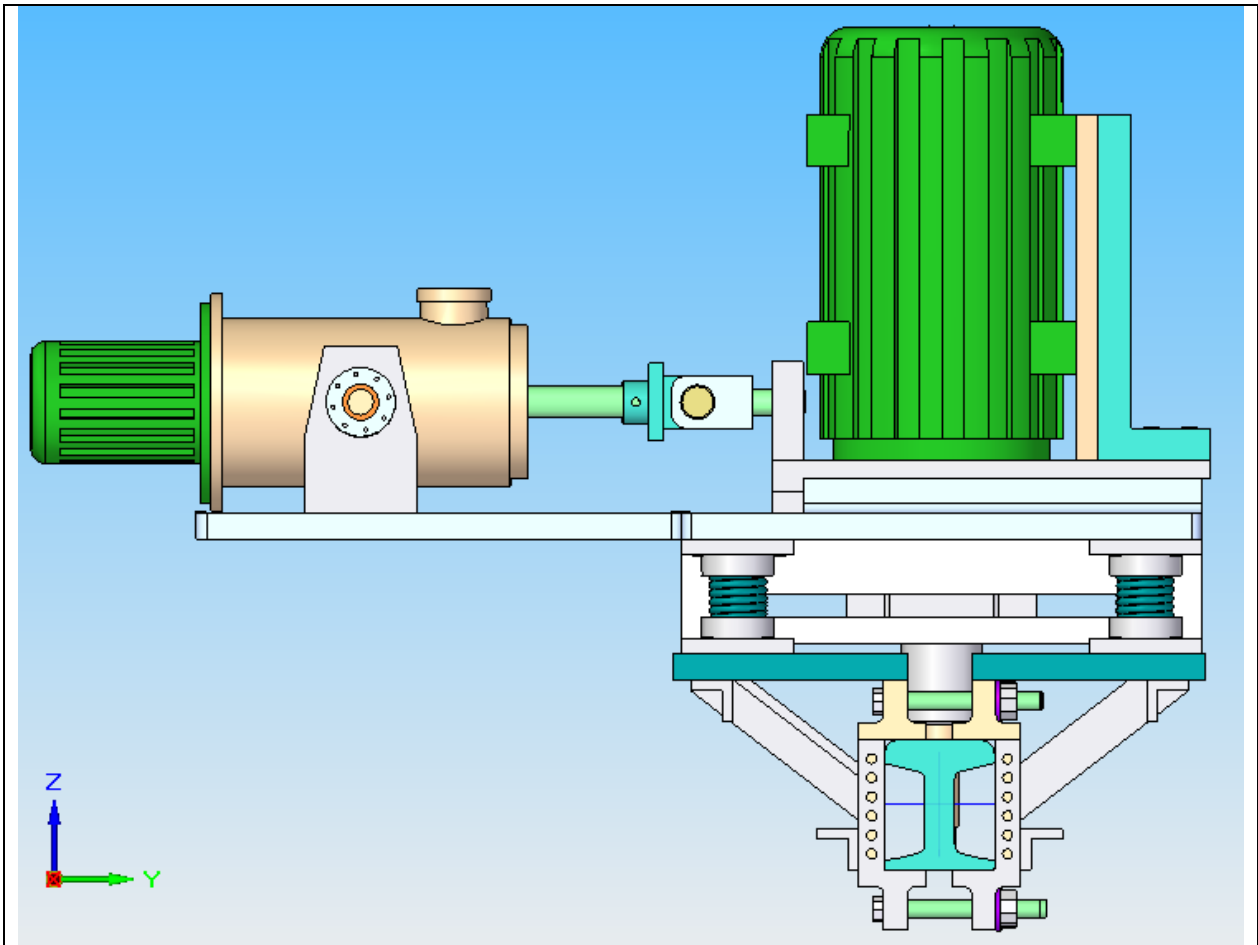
Right view of proposed friction stir welding machine
